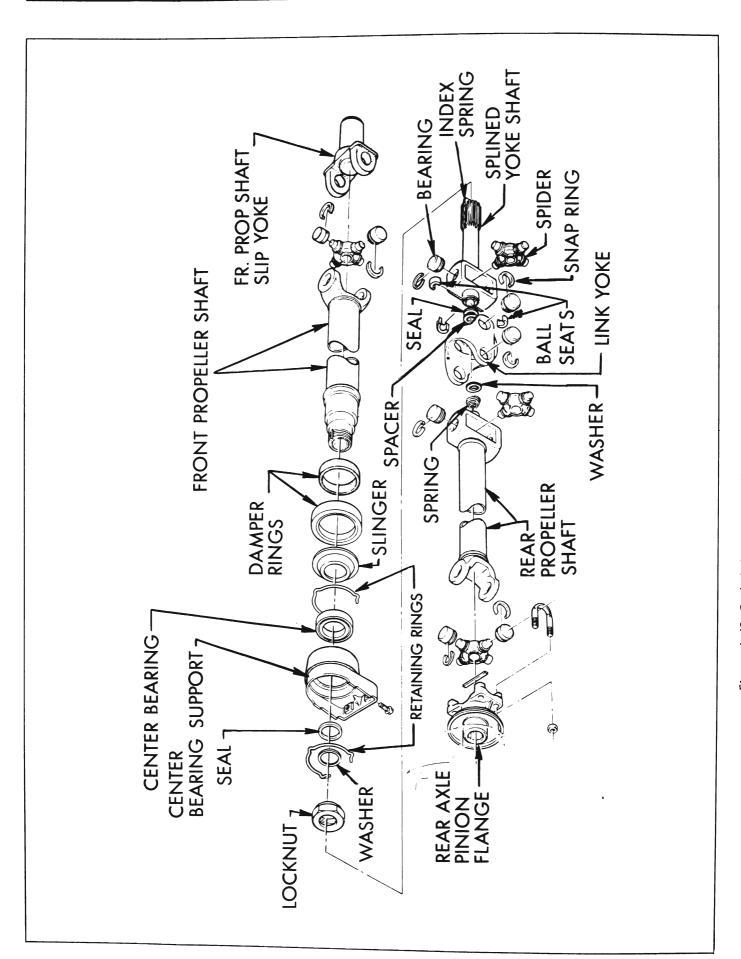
Exploded View-Propeller Shaft-4400-4600-4800 Series
